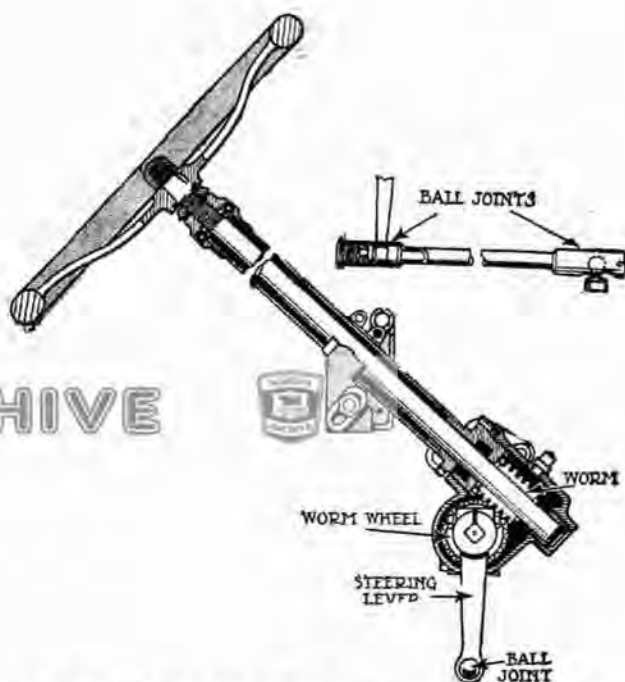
Worm and worm wheel steering lay-out, showing the steering lever and steering tube, or drag link, with its ball joints.
